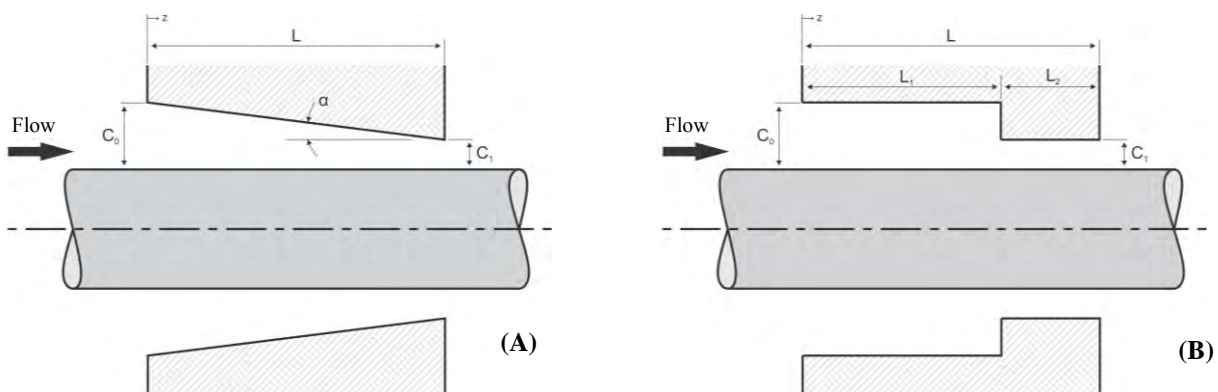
Other types of plain seals. (A) Tapered Seal, (B) Stepped Seal. (Adapted from Fleming (1977))
